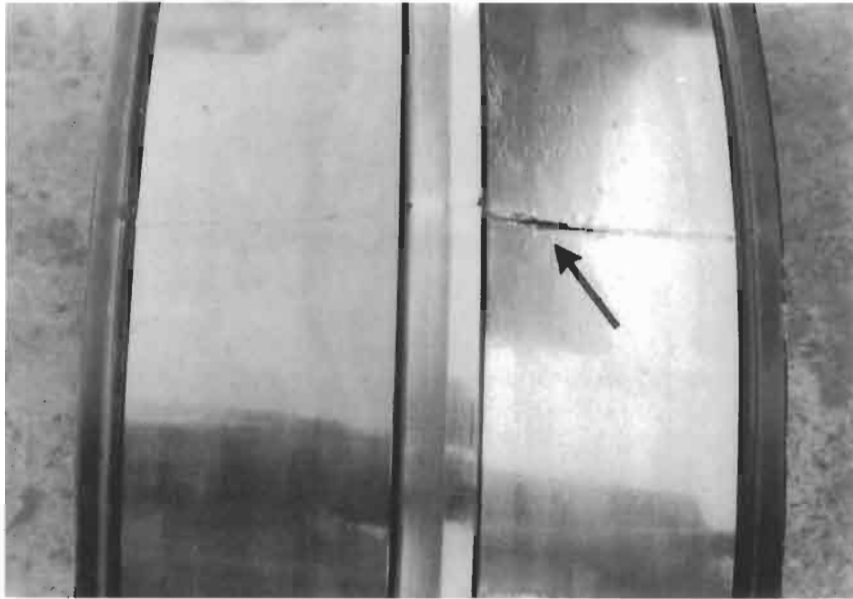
Inner ring of a thrust bearing showing extensive surface damage on one raceway, and through-cracking of the bearing ring.
